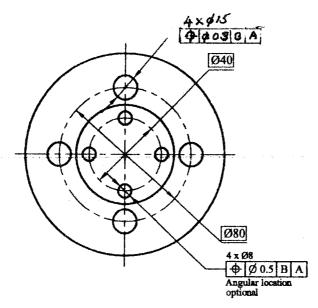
(b) - Positionally tolerance in one direction only
